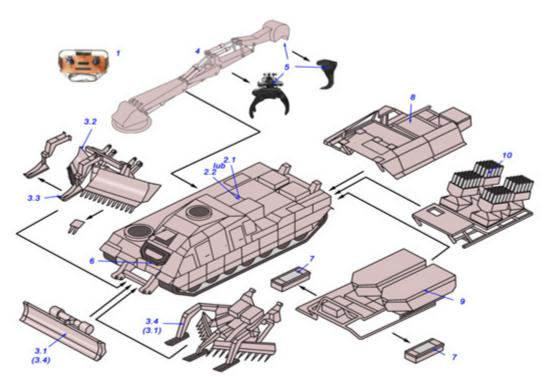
Fully equipped Recovery and Engineering Vehicle: 1. Electric control of hydraulic system; 2.1. Hydraulic system modification unit – option I; 2.2. Hydraulic system modification unit – options II – V; 3.1. Front casting dozer with extended cutting width; 3.2. Front casting and V arrangement dozer; 3.3. Front casting and V arrangement dozer with mine clearing teeth; 3.4. Full Width Mine Plough (FWMP); 4. JIB assembly; 5. JIB attachments: excavator scoop, grabber jaw, ripper tooth. 6. Electromagnetic minesweeper; 7. Cleared path marking device; 8. Exchangeable engineering equipment module; 9. Exchangeable module with mine-clearing line charges; 10. Exchangeable module with mine throwers
